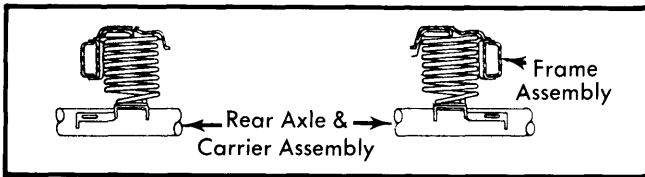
Coil Spring Position (Typical) (Cadillac Shown)
